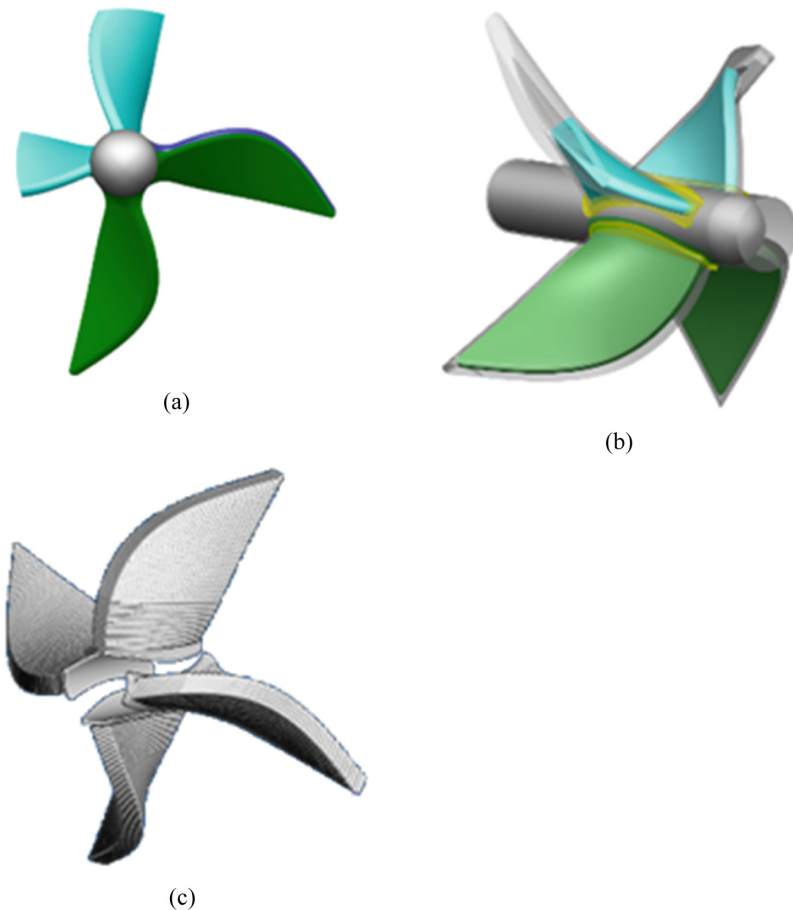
As-deposited shape of Design #1, (a) during deposition; (b) after deposition.
